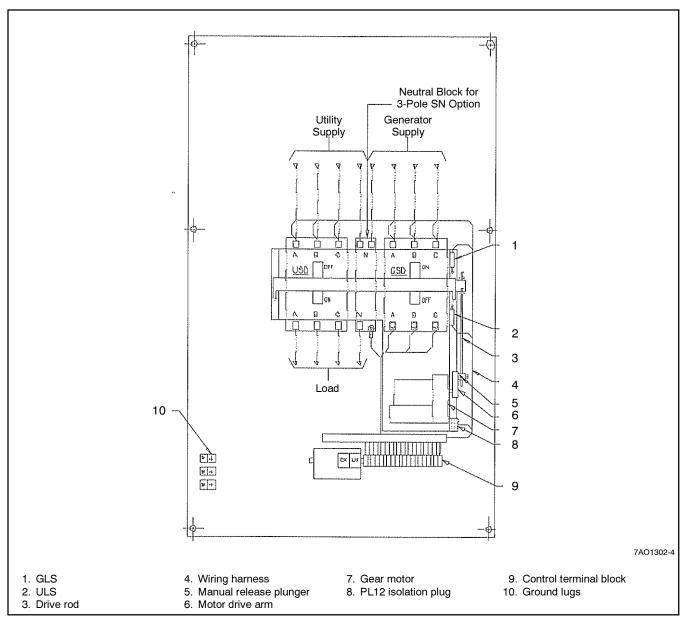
Front View, Typical, 3-Pole, 100A-250A Transfer Mechanism
